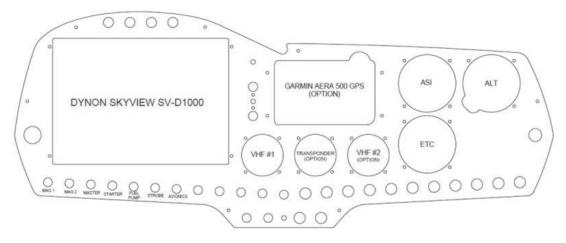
Instrument Panel Layout Type 3 (all J-Series)
